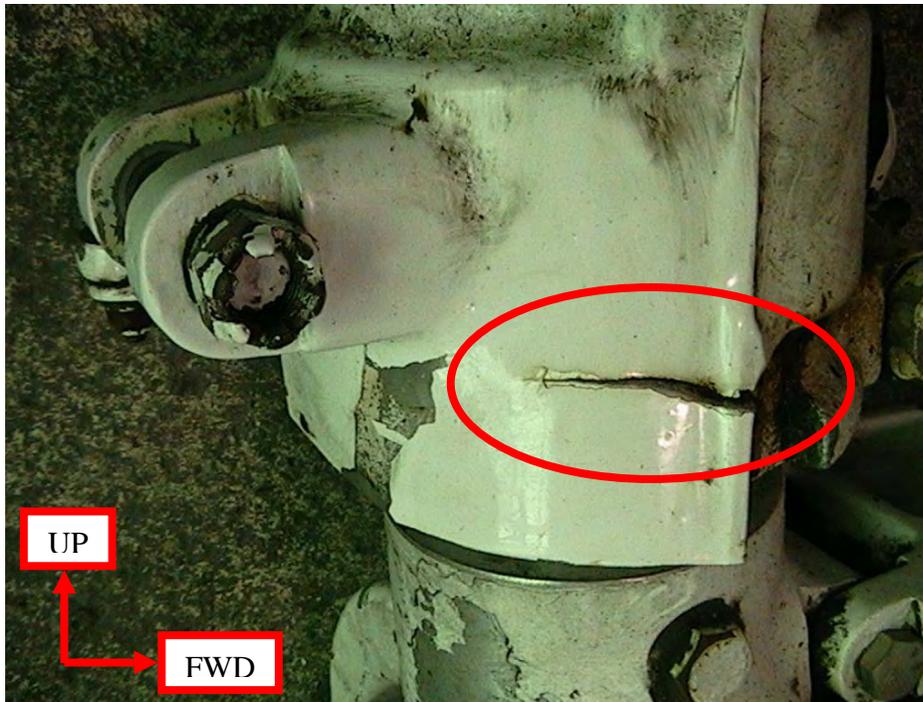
Crack in the Nose Landing Gear Strut Housing FS 25, WL 32, and RBL 2
